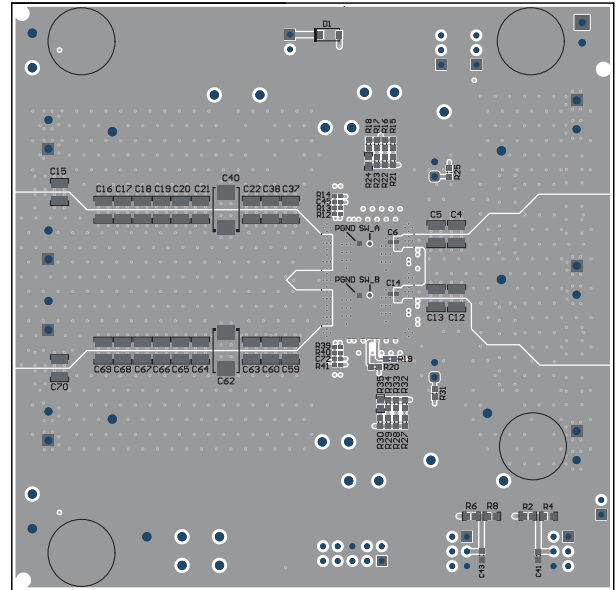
TPSM8D6C24EVM-2PH Bottom Side Component View (Bottom View)
